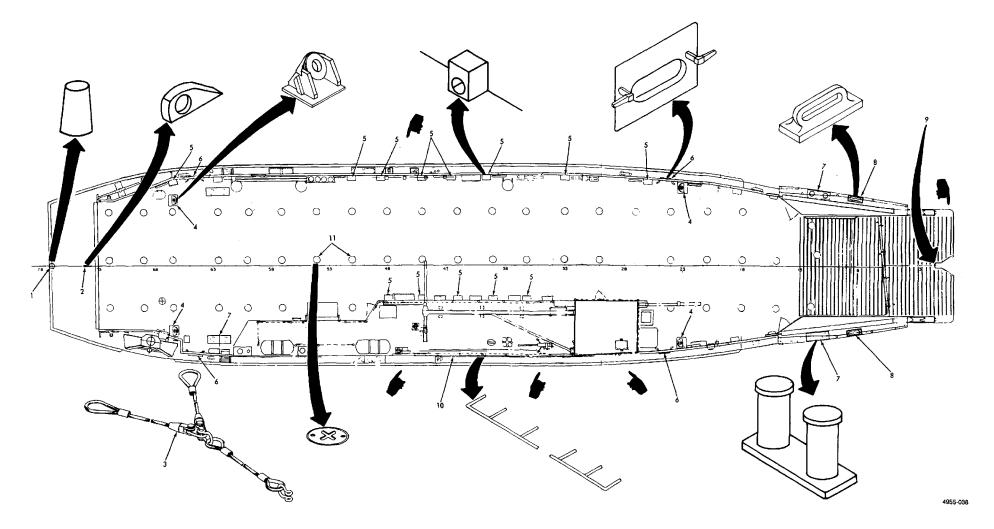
Mooring, Towing, Causeway Fittings and Lashing Gear
